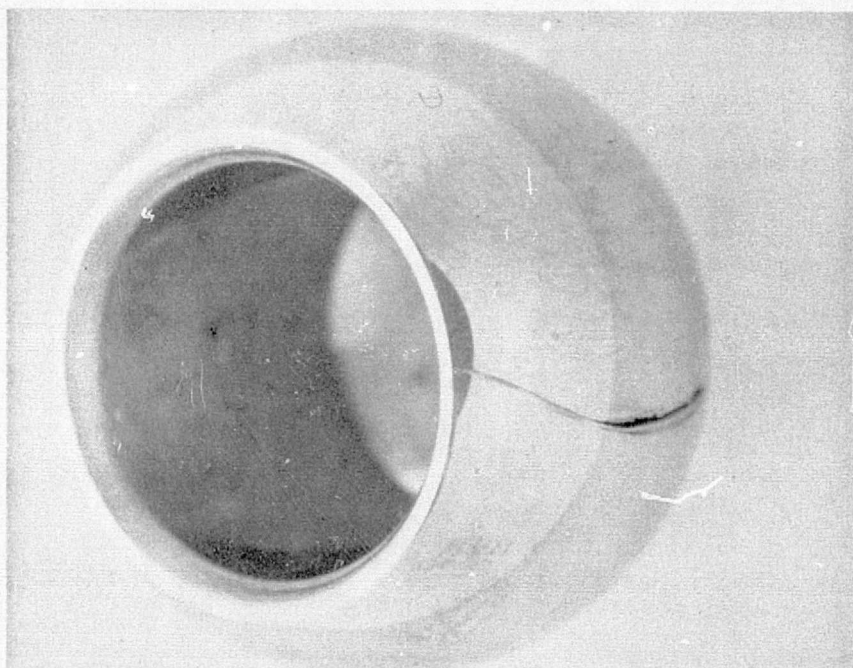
Design A Ball No. 11, Showing Failure With Diagonal Crack.
